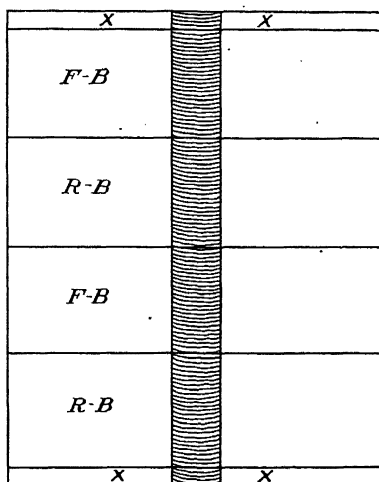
Butt weld marked for testing samples. *F-B*. Face bend.
